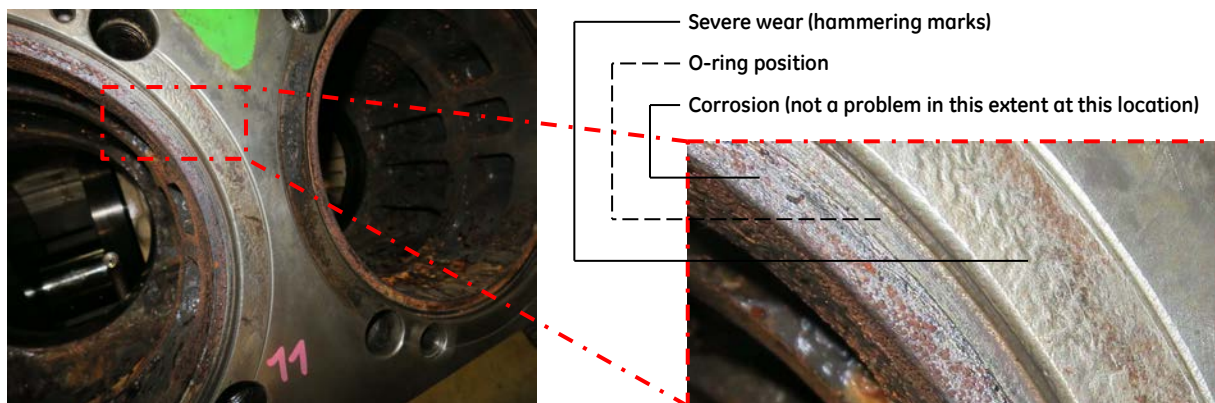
Crankcase – severe wear indications (hammering marks, corrosion)
